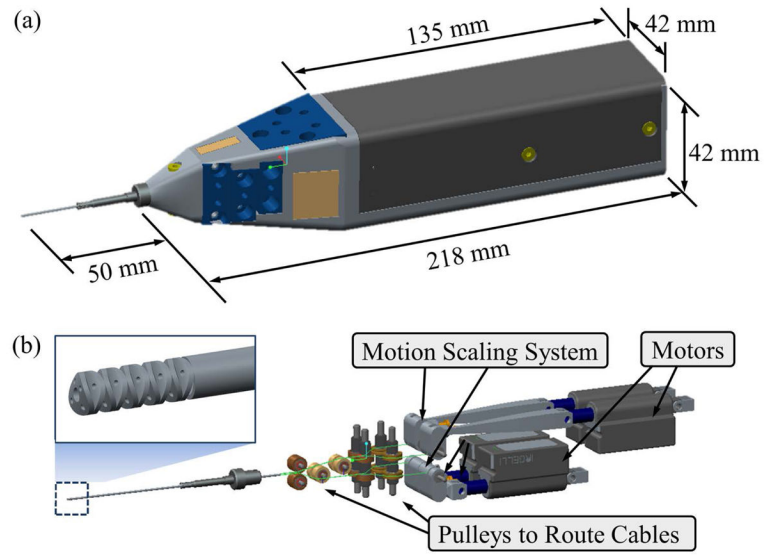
IRIS assembly: (a) overall dimension of IRIS system. (b) the components of the actuation unit in the view without the housing.
